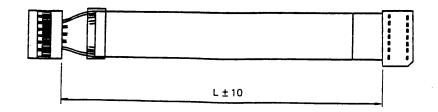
Cable: B660-1995-T003A (E501A Panel unit-Drive connecting)
